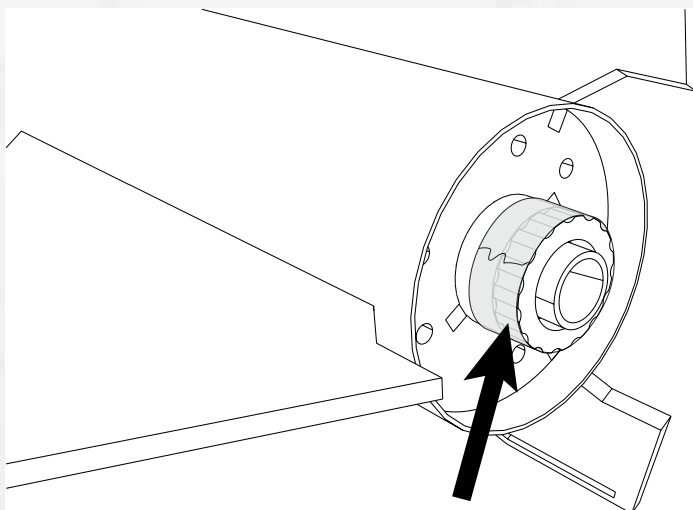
A motor tube allows you to wrap tape around the outside to hold the engine in the rocket.
